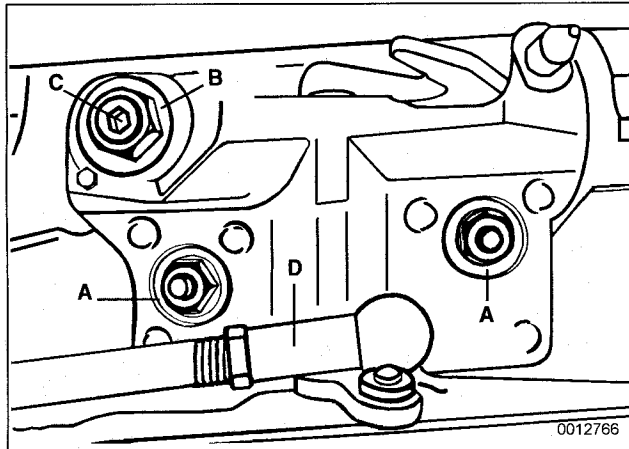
Manually operated front latch. Loosen mounting nuts (A) and locknut (B), then adjust latch height with hex-bolt (C). (Fully automatic front latch height adjuster is similar.) Latch tension is adjusted at rod ball-joint end (D).
